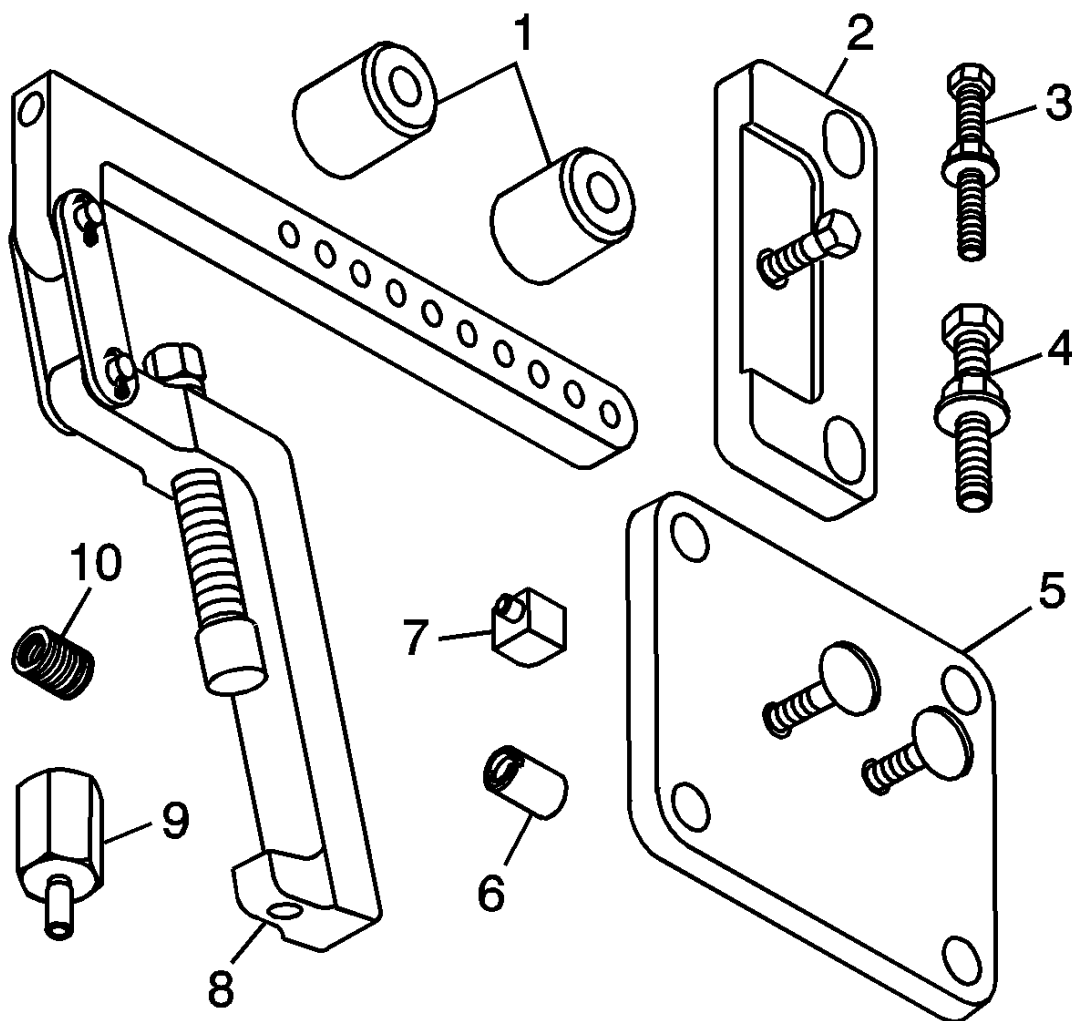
Identifying Rod Bearing Clearance Tool - Adapter Kit
